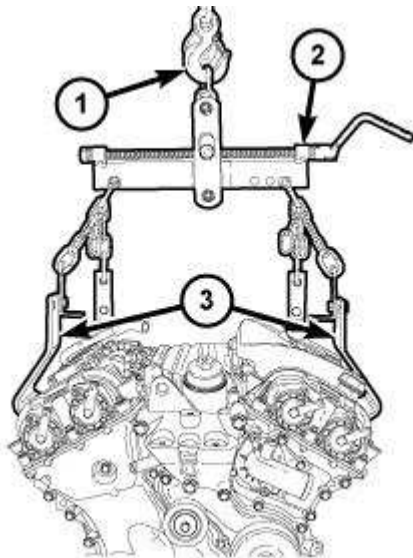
Passenger Side Engine Lifting Bracket & Bolts
